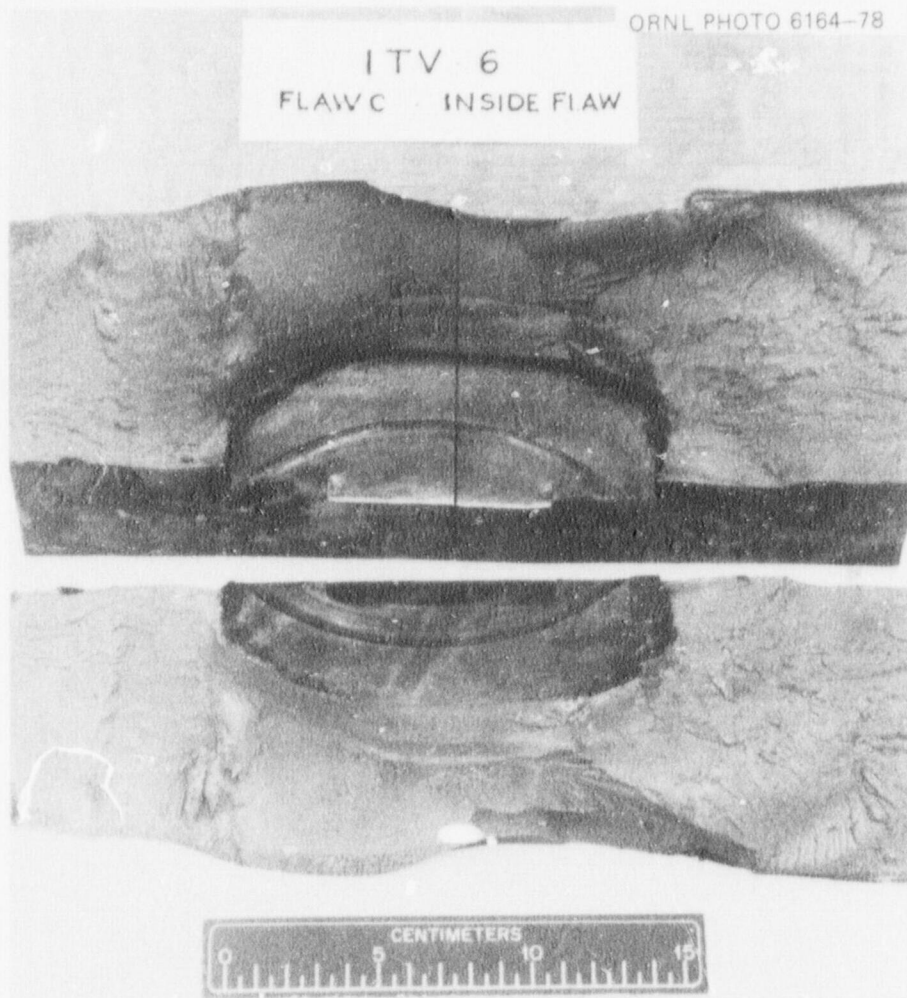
Fracture surfaces of flaw C from intermediate test vessel V-6.
